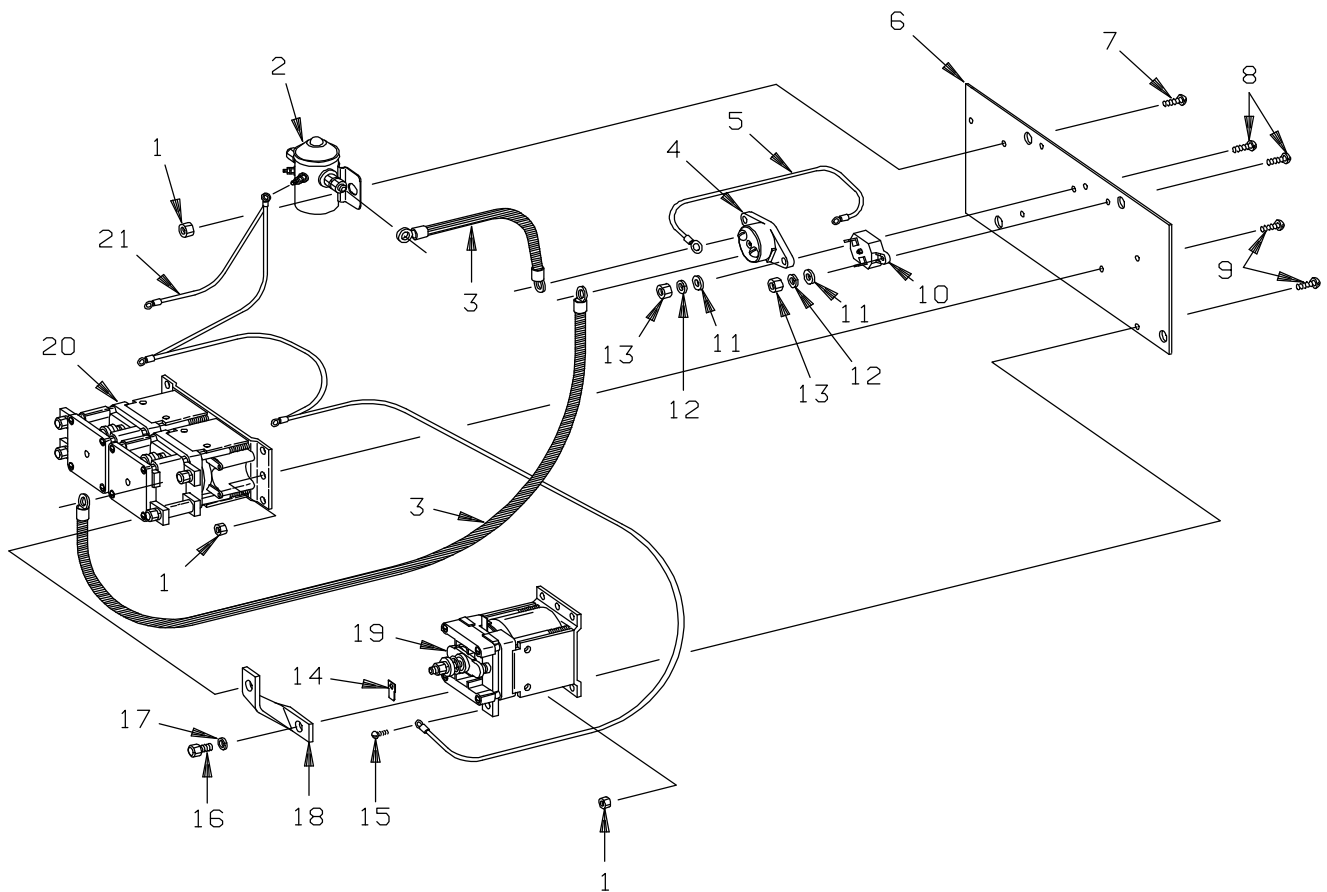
TRANSISTOR POWER COMPONENT WIRING
